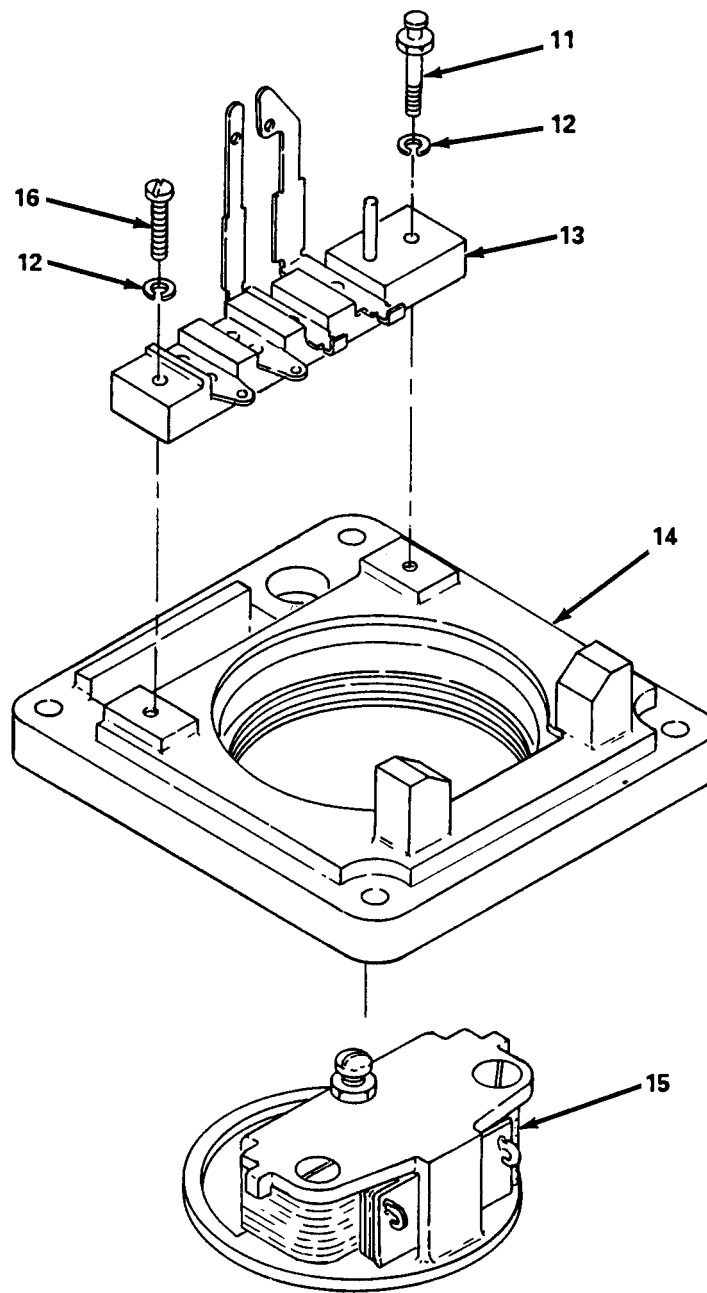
Handset Cover Assembly (Sheet 2 of 2).
